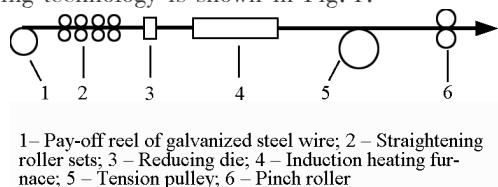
Schematic diagram of single tensioning die drawing of galvanized wire
